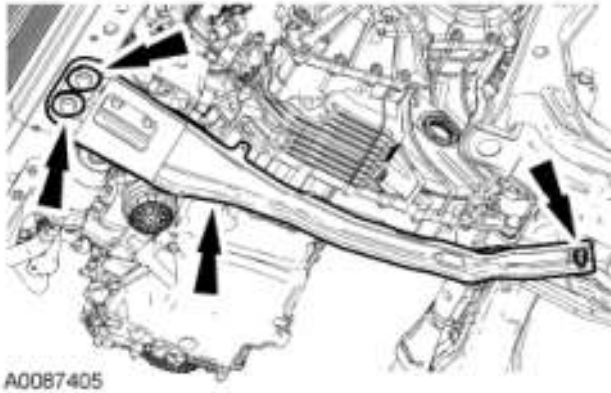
Identifying Engine Support Crossmember Nut And Bolts
